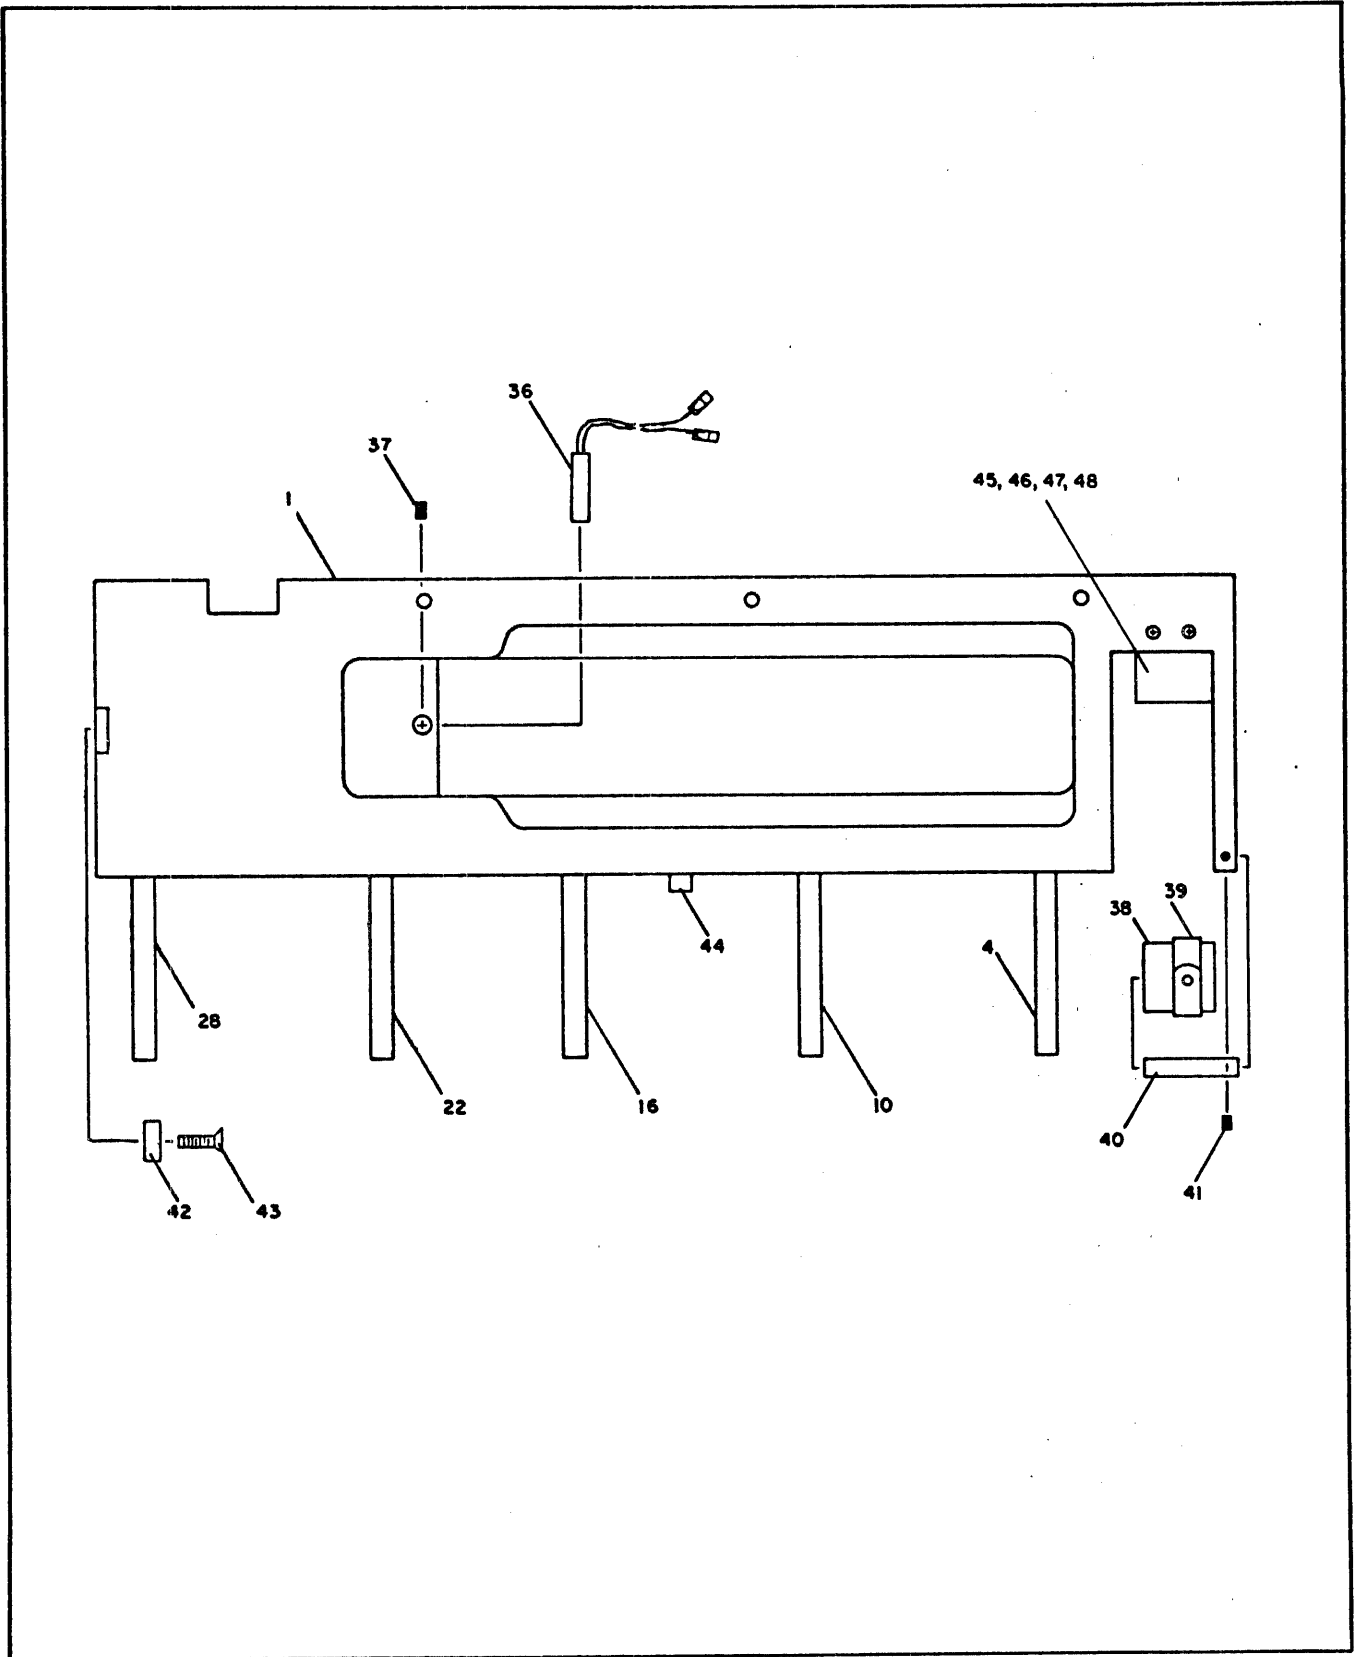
STACK SUPPORT ASSEMBLY (sheet 2 of 2)
